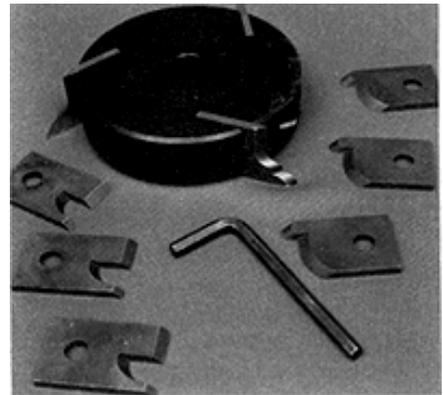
The molder head is a thick, heavy steel disc that has equally spaced slots around its perimeter to receive sets of molder knives. A special 5/8" molder/dado arbor (not shown) mounts the molder head to the MARK V main spindle.
